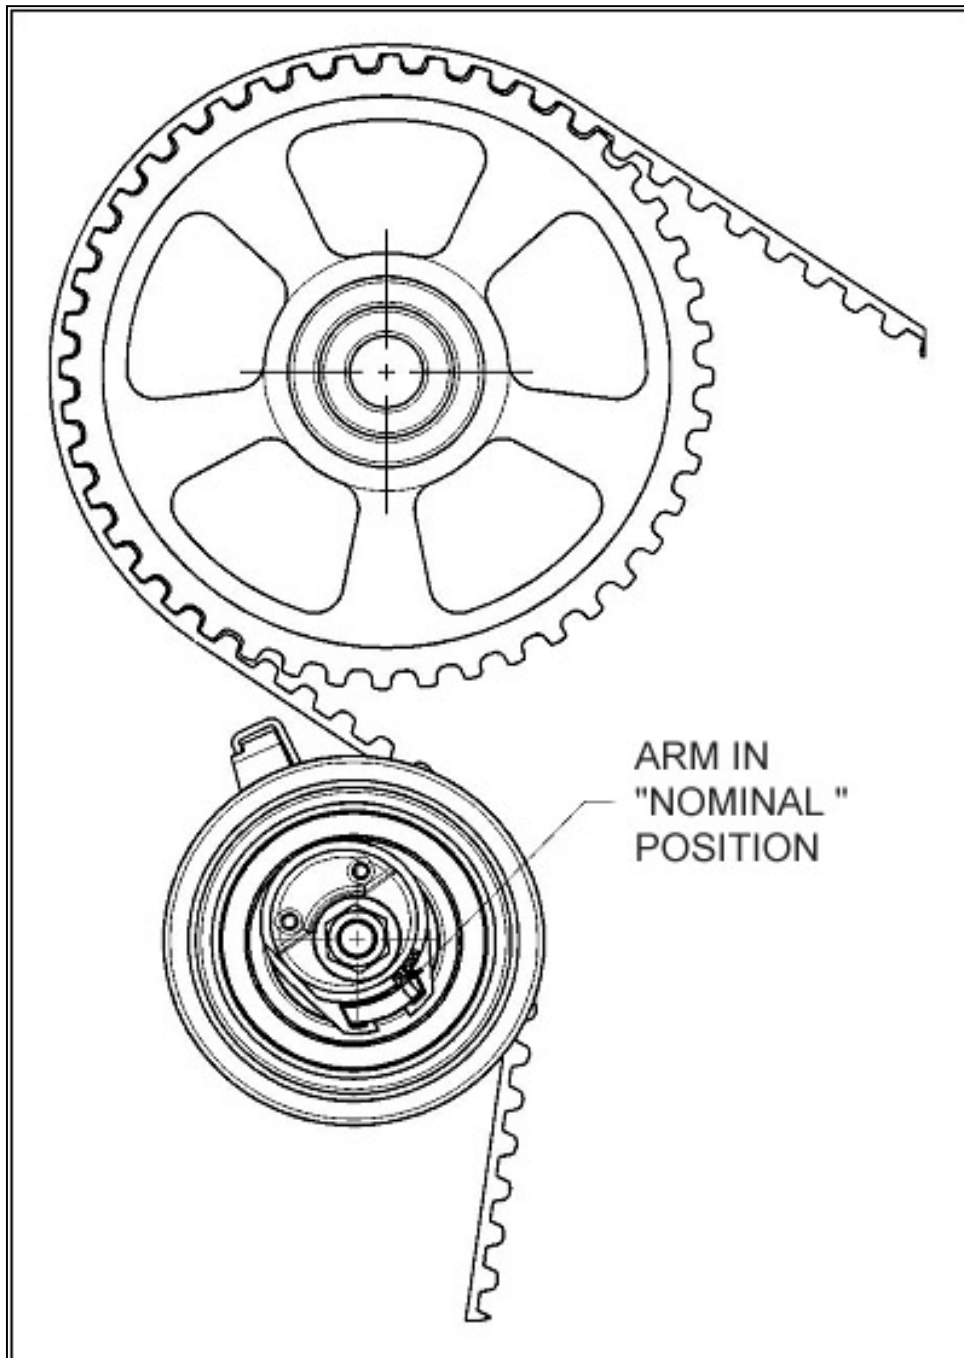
Remove camshaft block. Rotate the engine two complete turns and re-align the crankshaft to T.D.C. Check the nominal position of the tensioner and readjust if needed.
